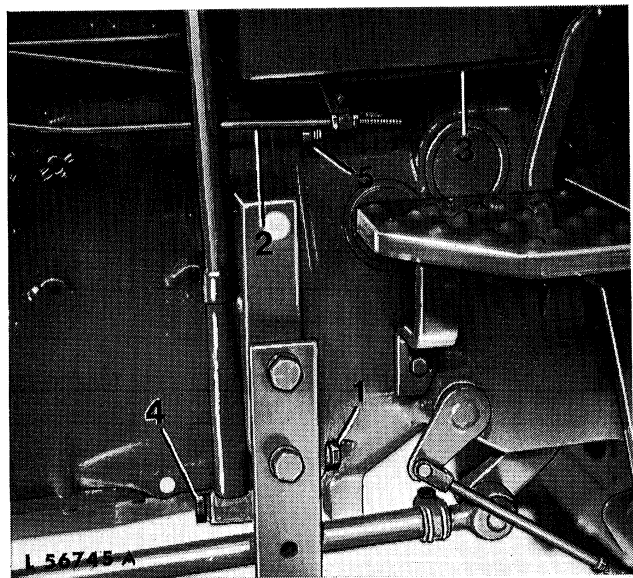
Separating between Engine and Clutch Housing, L.H. Side
